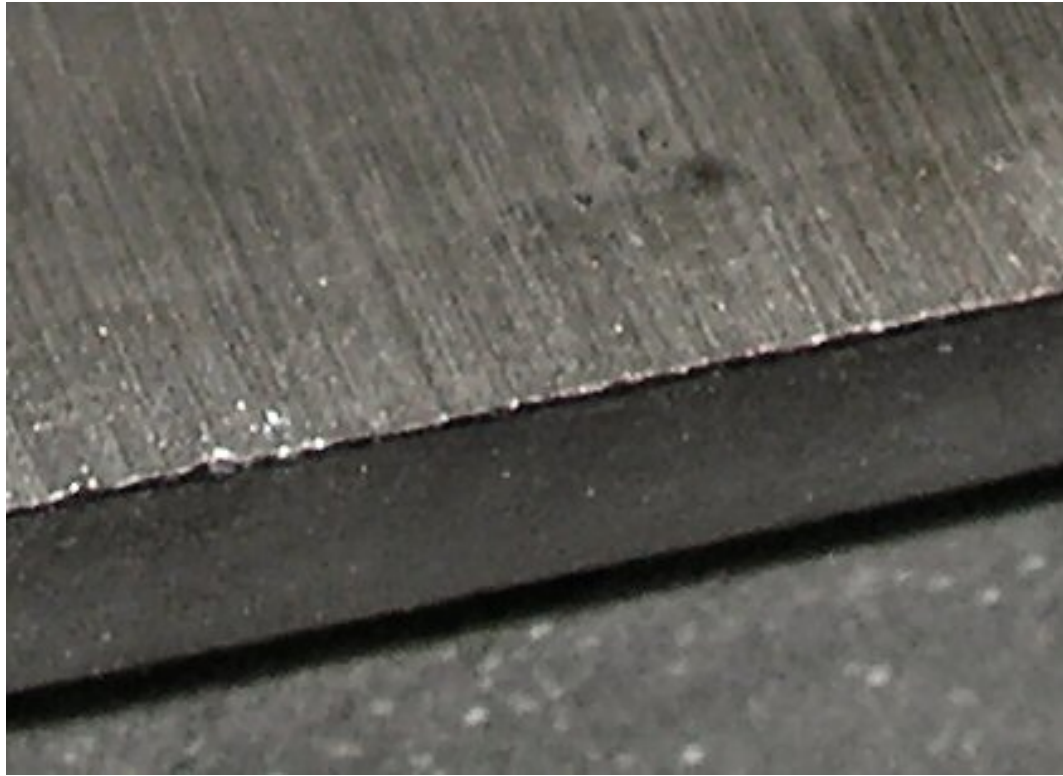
Interior of a knife-cutter after grinding printed circuit board. Note smeared material in the grooves.
